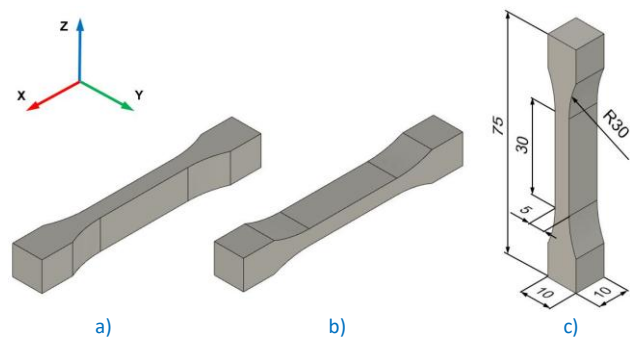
Possible spatial orientations of printed parts [Siemiński 2021]: a) flat (XY), b) on edge (XZ), c) upright (ZX)
